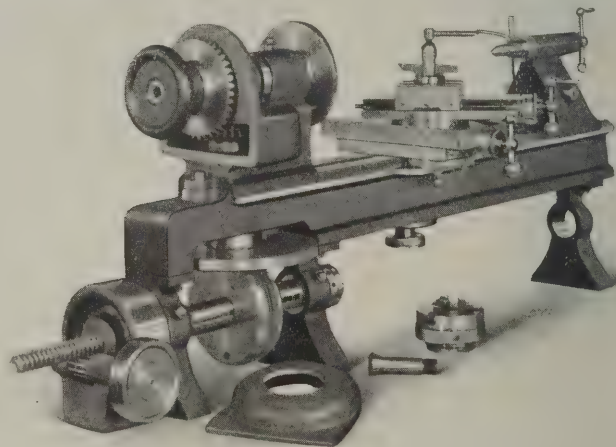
Another View of the Precision Lathe—Spindle Gear Guard removed
